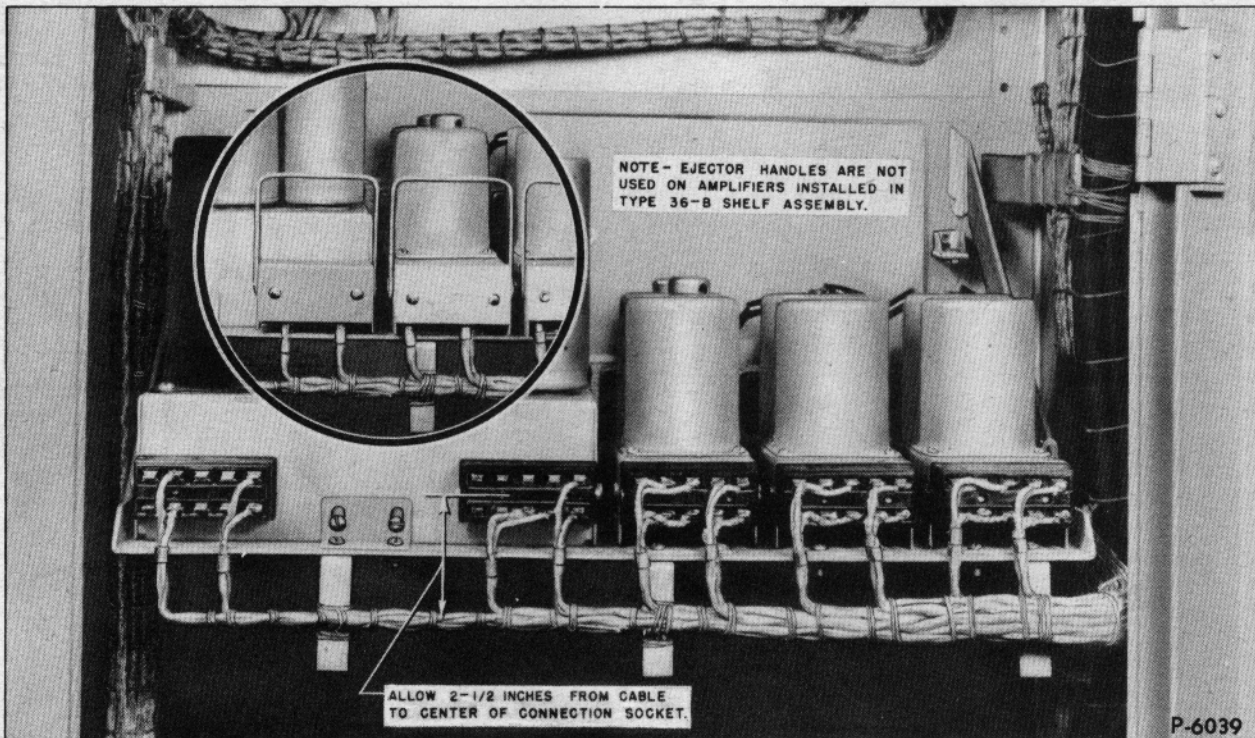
Mounting and wiring in Type 36-B Panel and Shelf assembly (covers removed).
